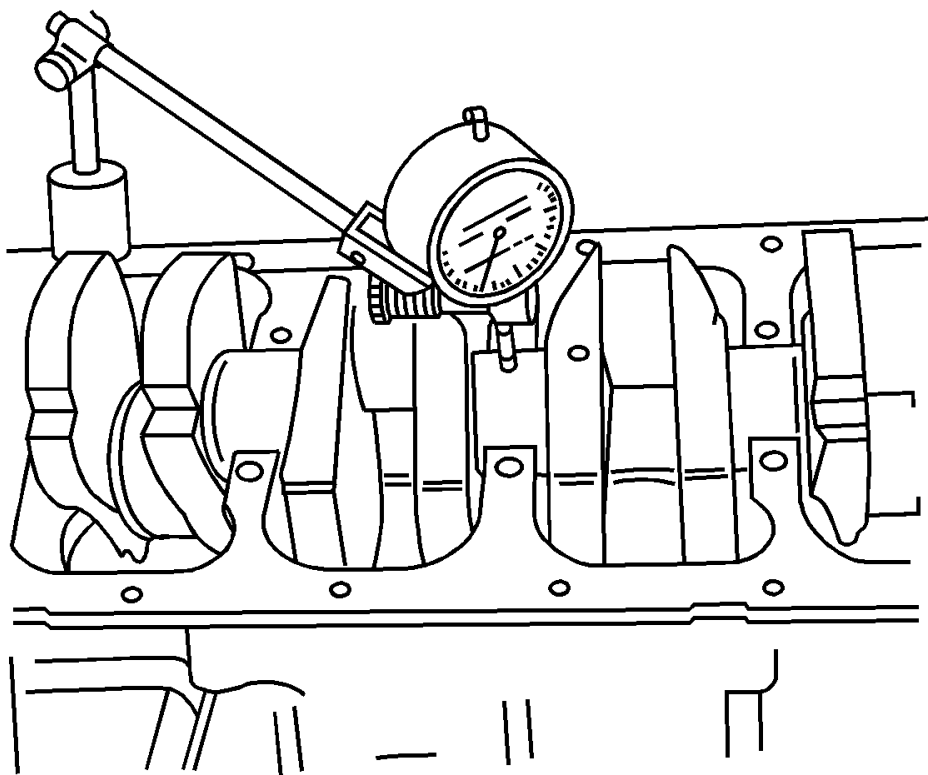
Checking Crankshaft Journal For Out-Of-Round Runout
